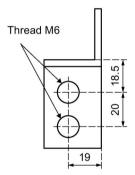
Bolting points for the mounting rails (dimensions in mm)
